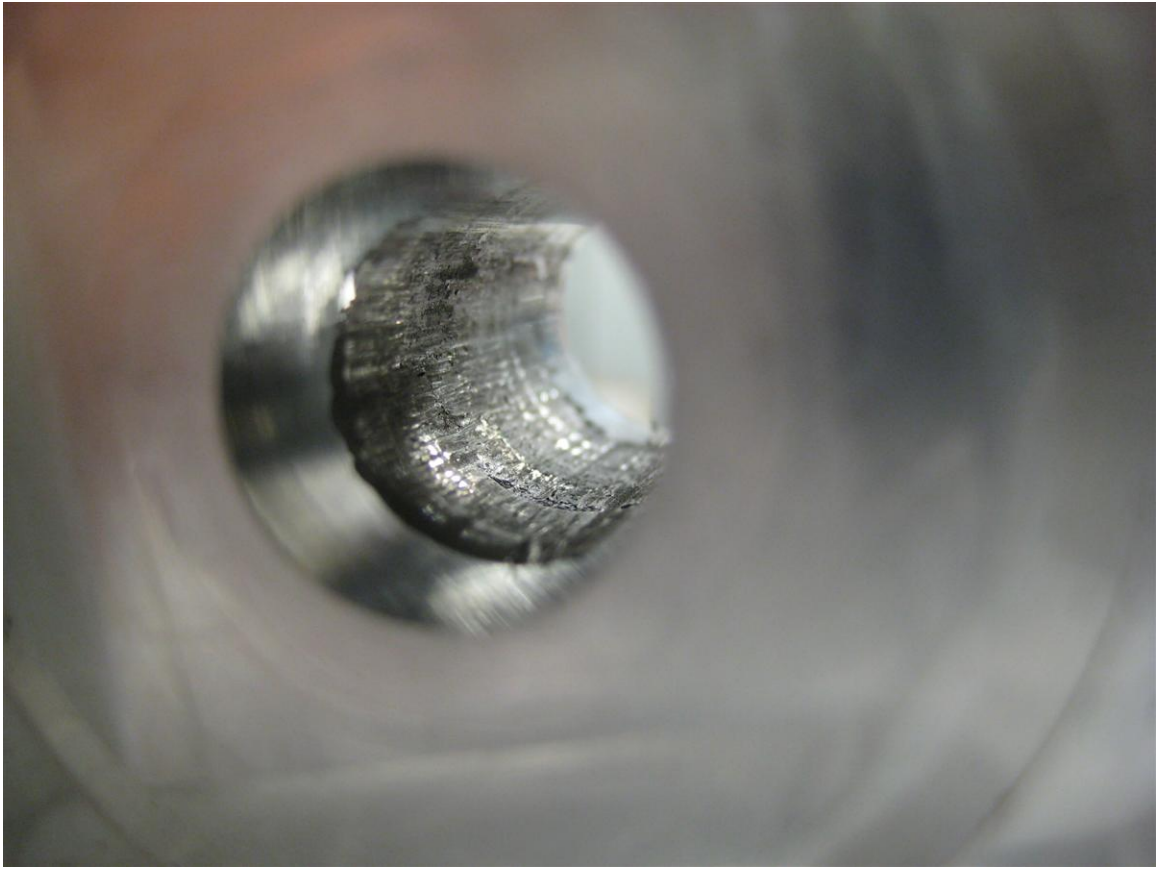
Damage to compressor cylinder, view from outside compressor, Revision 00.
